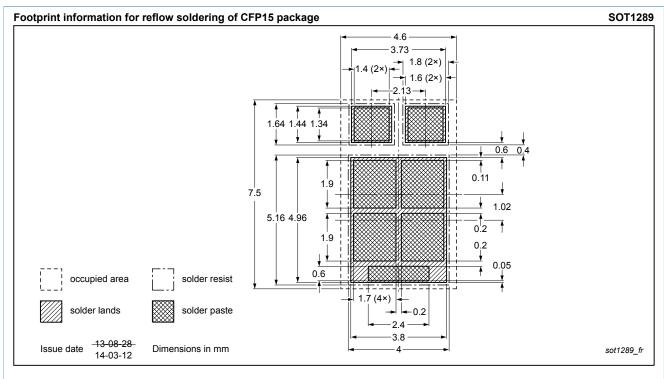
Reflow soldering footprint for CFP15 (SOT1289)
